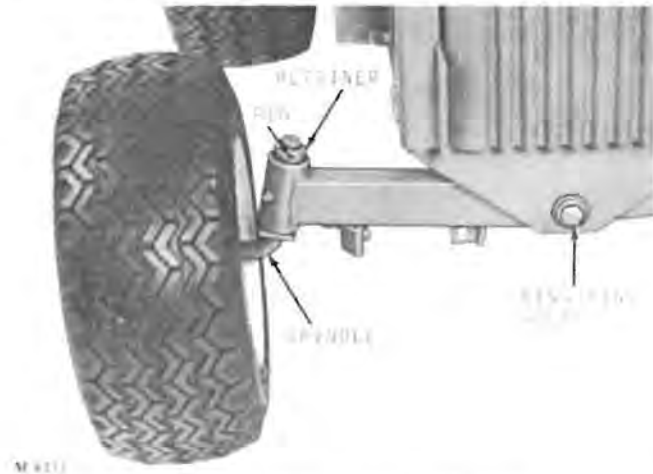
Front Axle, Spindles and Front Wheels with Bearings 110 Tractors ( -15000)
